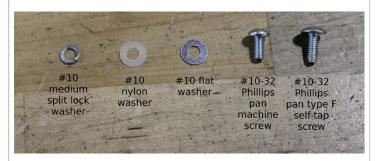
Typical hardware that would come in the hardware kit. Note the grooves at the end of the type-F screw threads.
